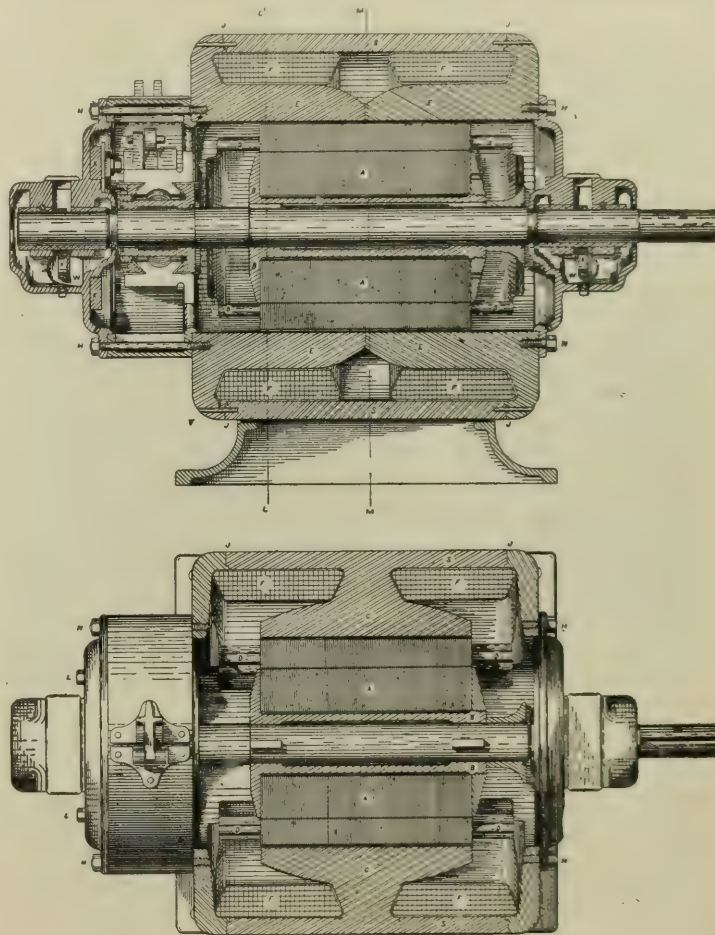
STOREY MOTOR, SECTIONAL VIEWS
